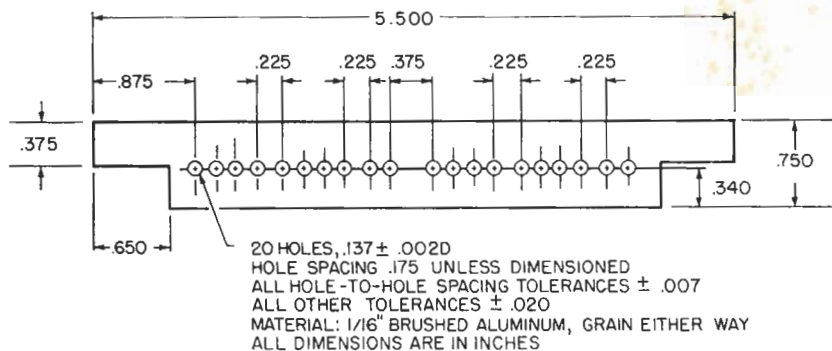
THE FRONT PANEL is formed from a sheet of 1/16-inch brushed aluminum.
